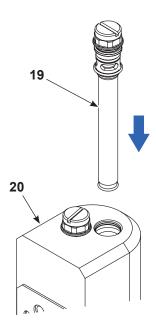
Fasten Fluidizing Tubes into Manifold
